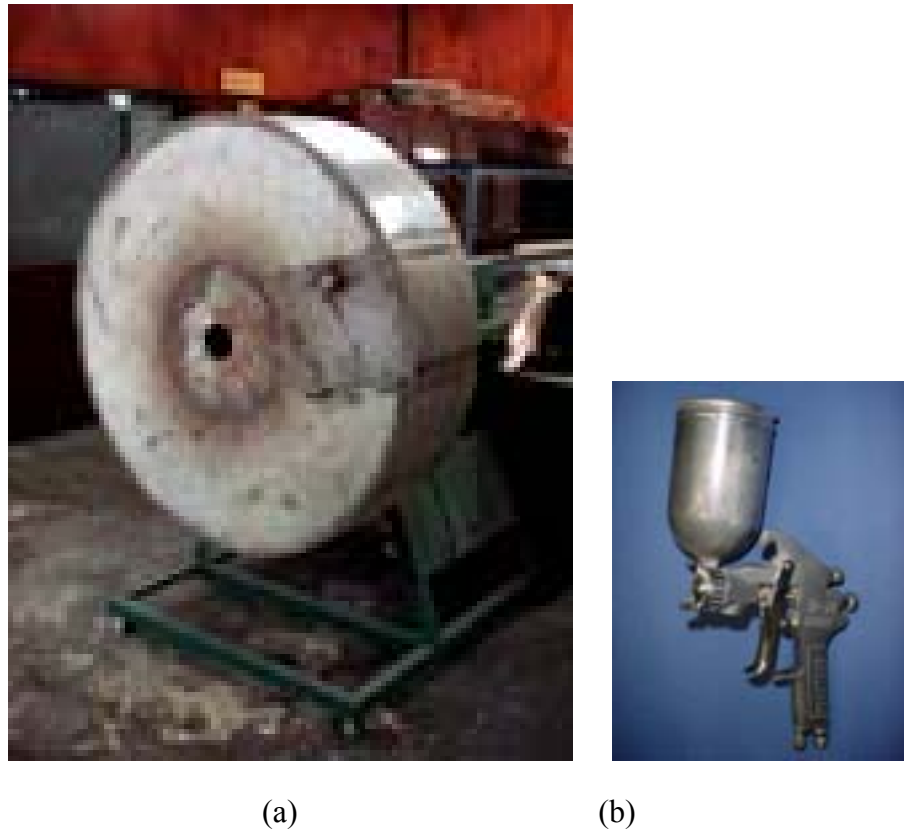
(a) Rotary drum for glue blending (b) Spray gun
